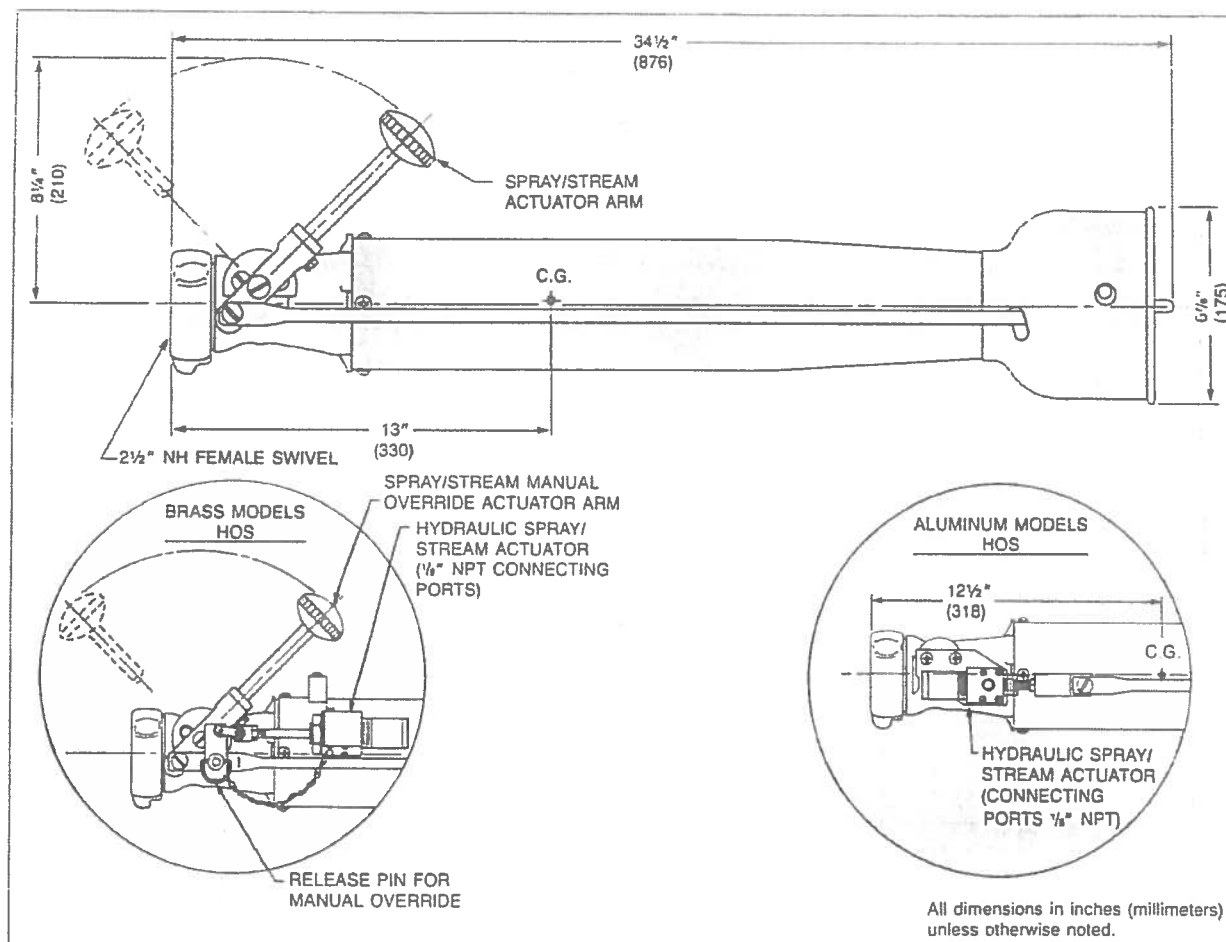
PC-40, 50, 60, and 85 MOS Series (Manually Operated Spray) Nozzles. HOS (Hydraulically Operated Spray) Nozzles Shown in Inserts — Outline Dimensions
